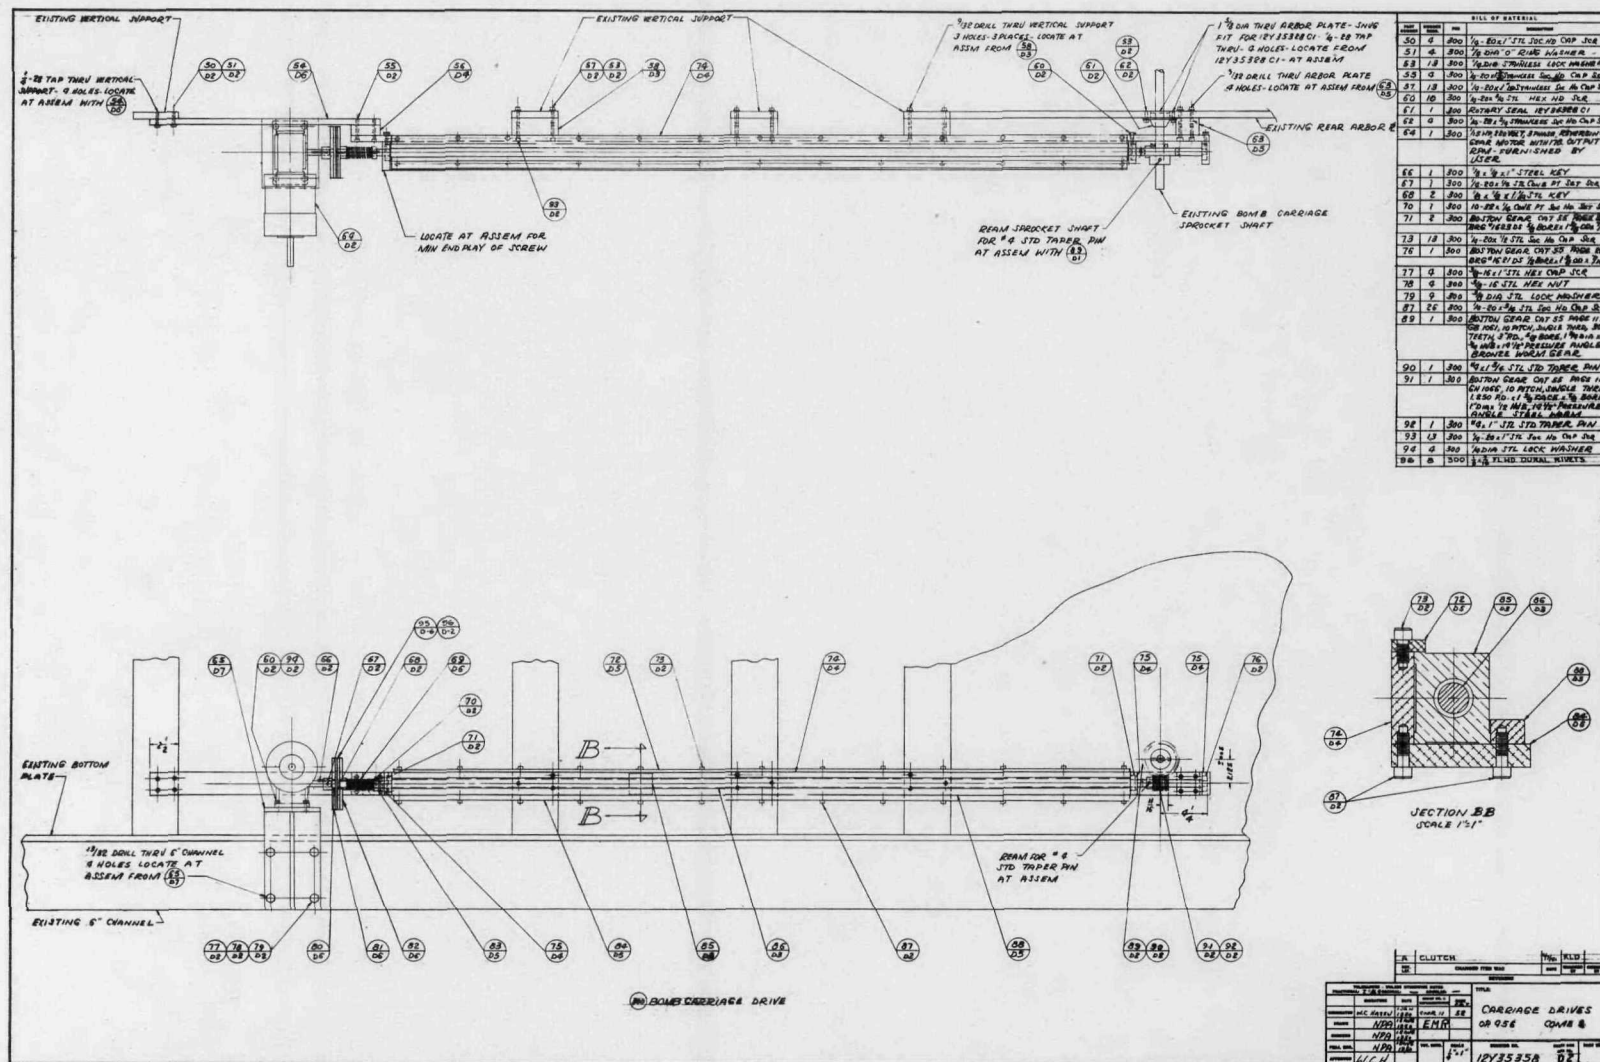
Design layout of reduction bomb carriage drive mechanism.
